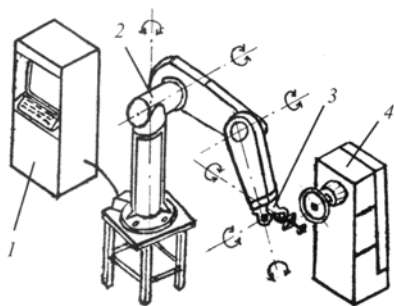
Robotic technological complex: 1) control system; 2) industrial robot; 3) holder; 4) SAG-3 polishing machine.
